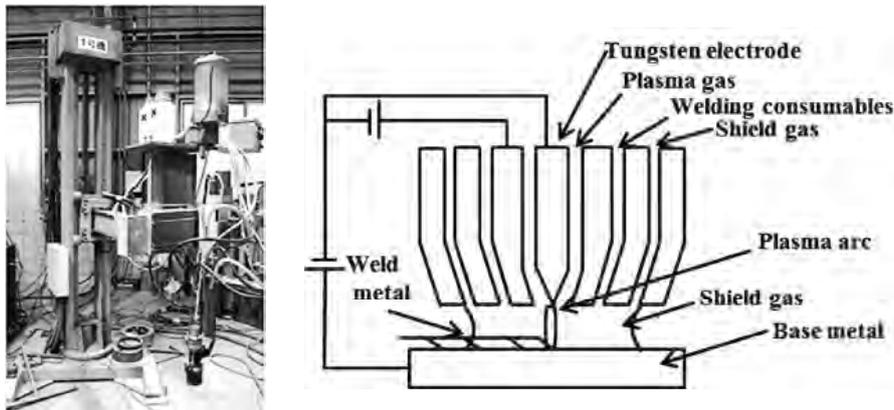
View of PTA-welding machine and schematic illustration of PTA-welding
